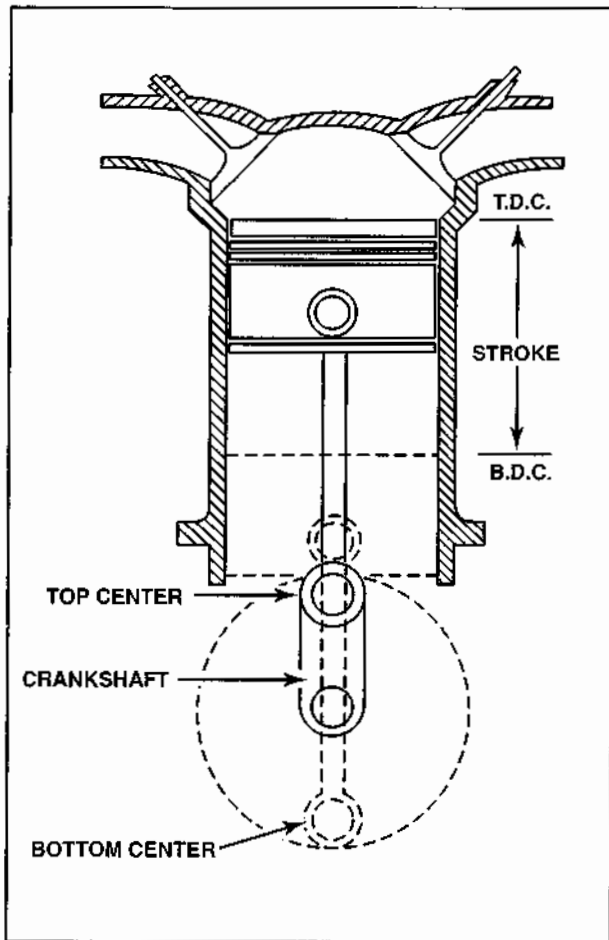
One stroke is equivalent to the distance a piston head travels between bottom dead center and top dead center. In all reciprocating engines, one complete stroke occurs with each 180 degrees of crankshaft rotation.
